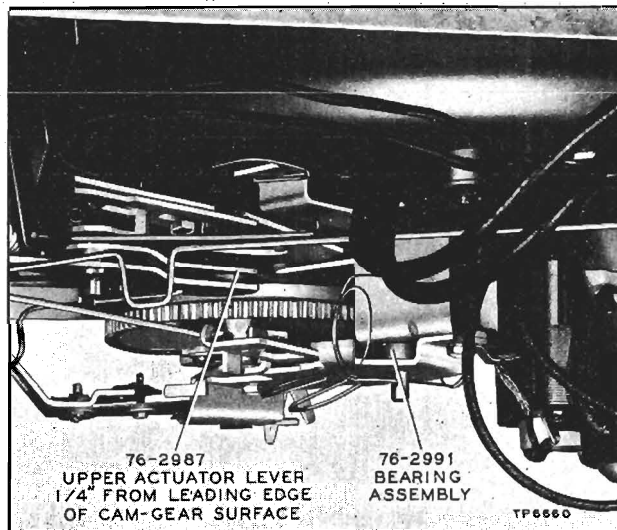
Tone-Arm Horizontal Timing Adjustment, Showing Upper Actuator Lever in Contact with Cam Gear
